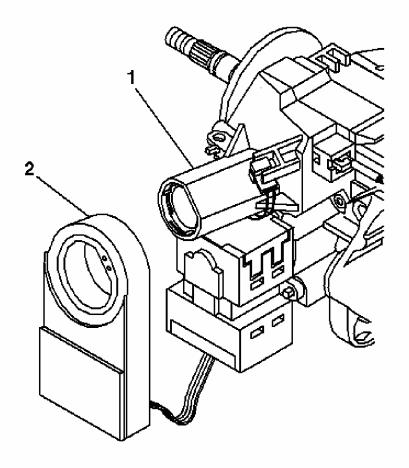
Locating Theft Deterrent Module & Ignition Lock Cylinder Case Assembly Courtesy of GENERAL MOTORS CORP.
